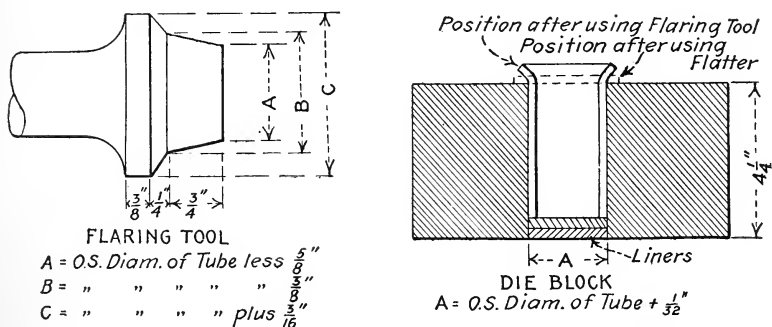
DETAILS OF FLARING TOOL AND DIE BLOCK REQUIRED FOR MAKING FLANGE TESTS OF BOILER TUBES
